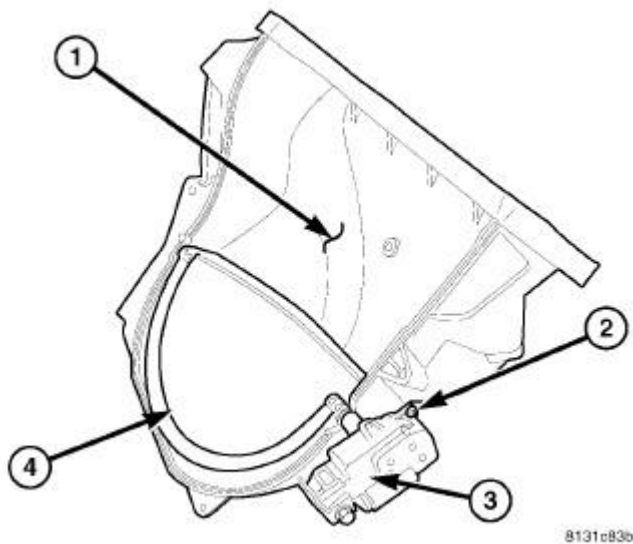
Identifying Air Inlet Housing, Screws, Recirculation Door Actuator & Recirculation-air Door
